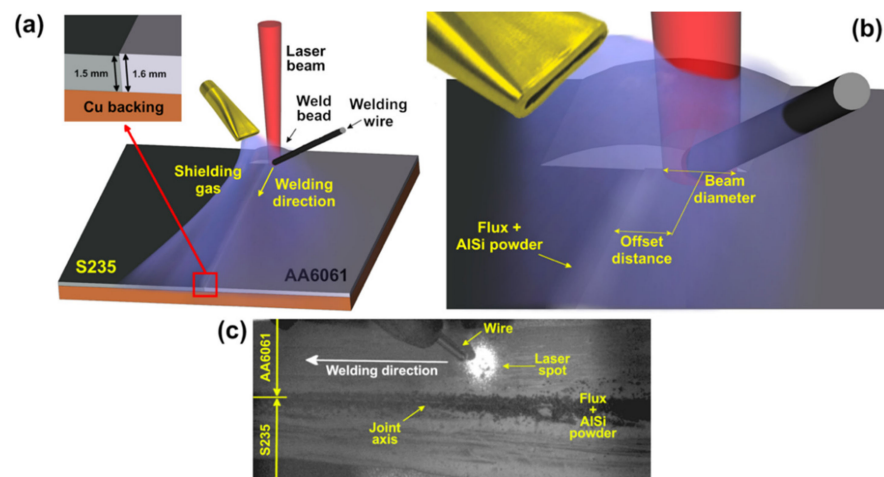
Welding–brazing approach proposed by Wallerstein et al.: 45 degrees-tilted welding wire in combination with preplaced AlSi powder mixed to the brazing flux. (a) Overview; (b) Detailed processing area; (c) Picture of joining setup. (Reprinted with permission from ref. [89]. Copyright 2021 Elsevier).
